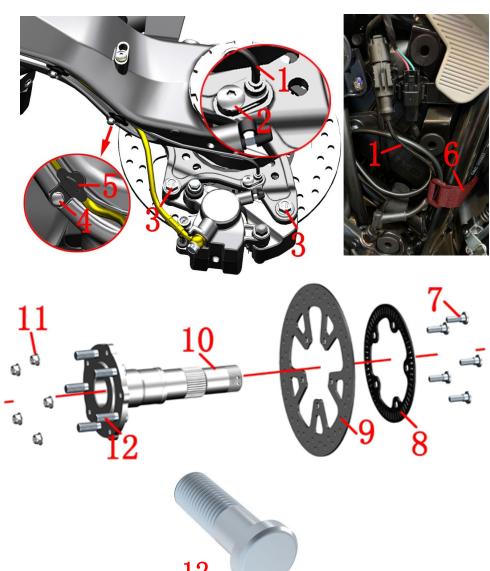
RI	EAR WHELL	Rear axle assembly	CHK	401
